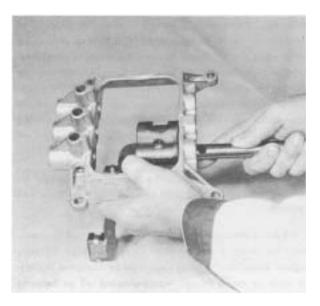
Install 4th & 5th shift rod through support and into 4th & 5th shift fork.
